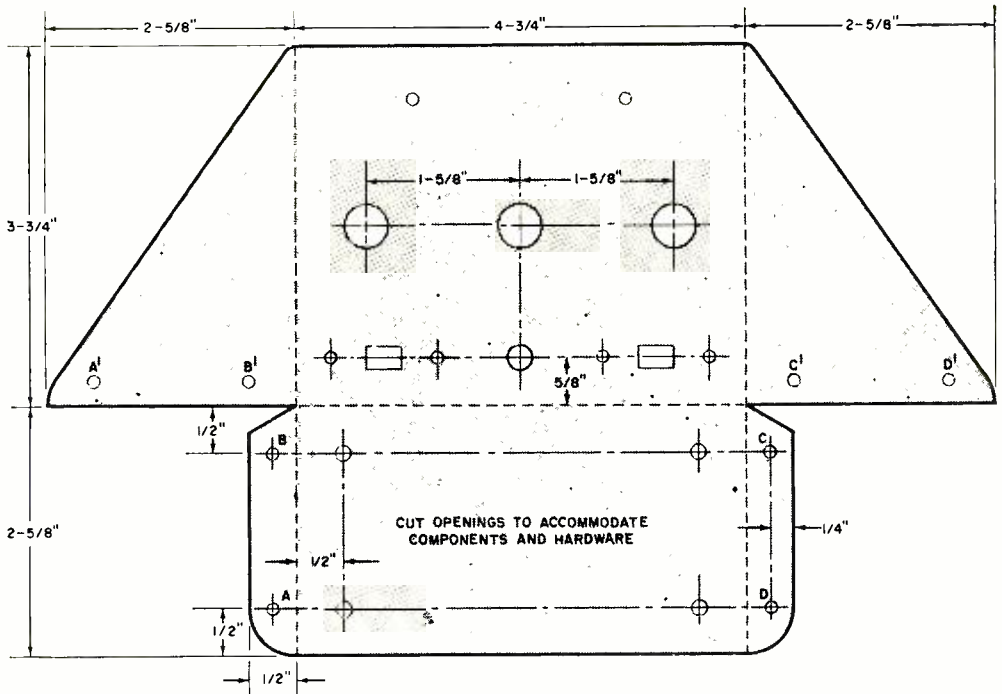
Chassis can be formed from a thin piece of sheet aluminum. Drill and shape to size as shown.
